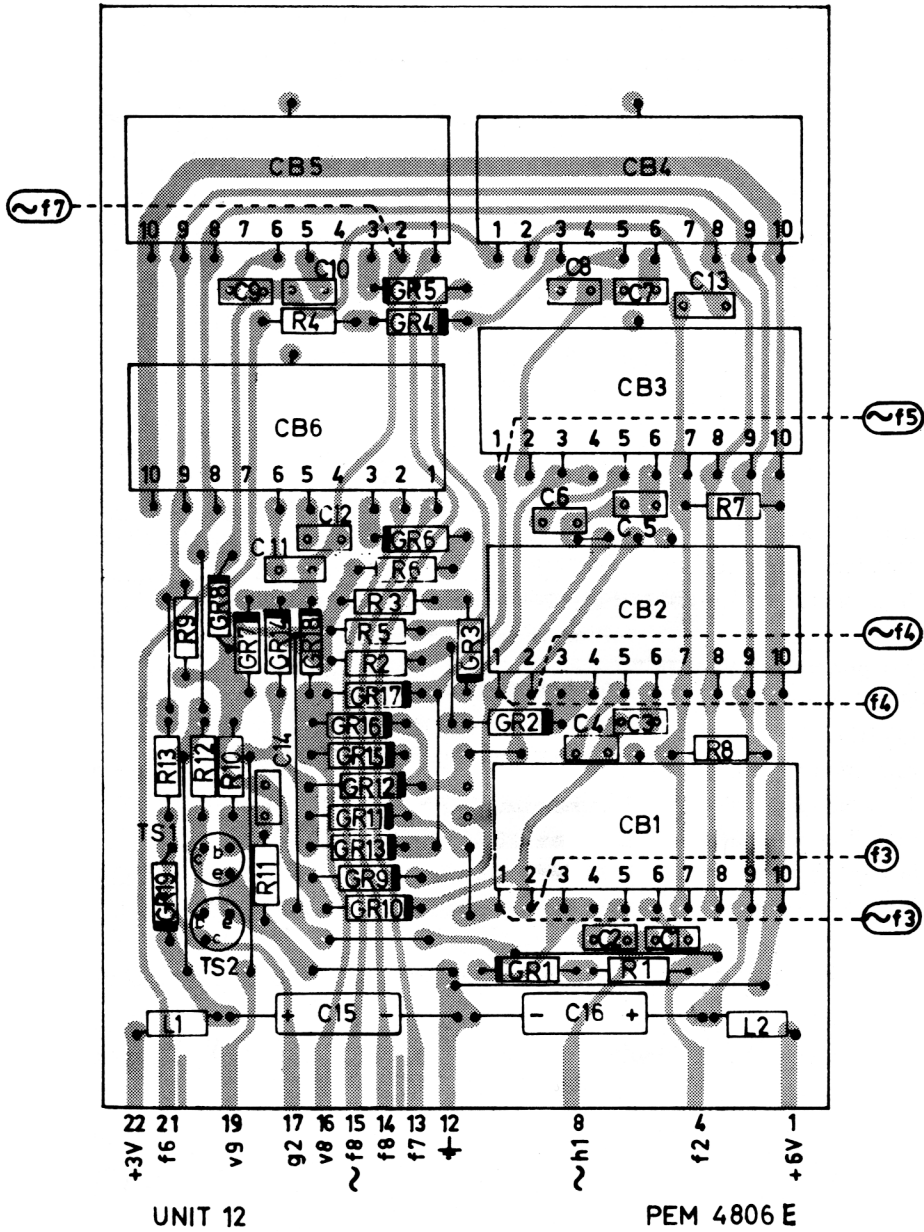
Printed wiring board, vertical divider (E version), Unit 12
